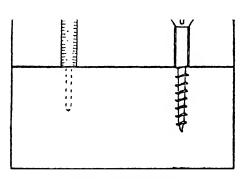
(Left) Hole prepared for Screw. (Right) Screw inserted.
